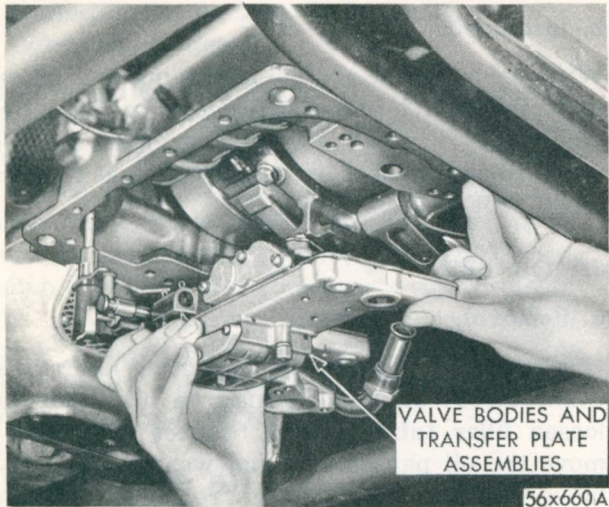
Removal and Installation of Valve Bodies and Transfer Plate Assembly
